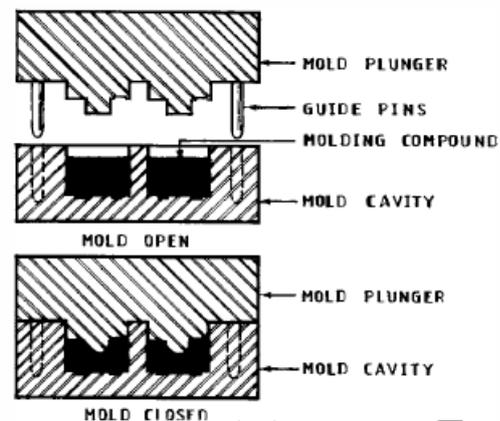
Schematic of a compression molding operation showing material before and after forming.
